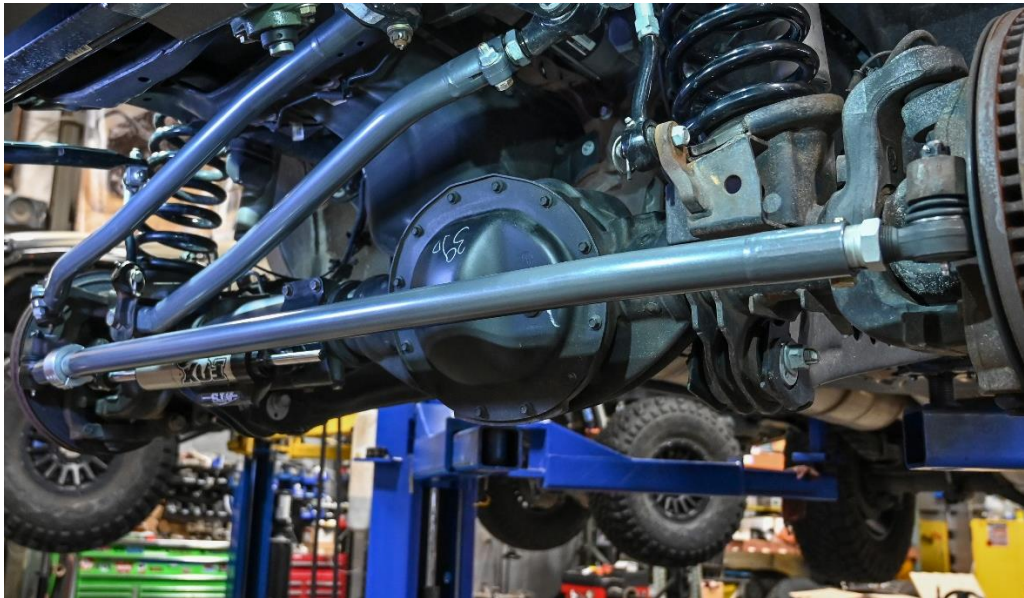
Tie Rod Aligned with Bend Forward and Pinch Bolts Back
